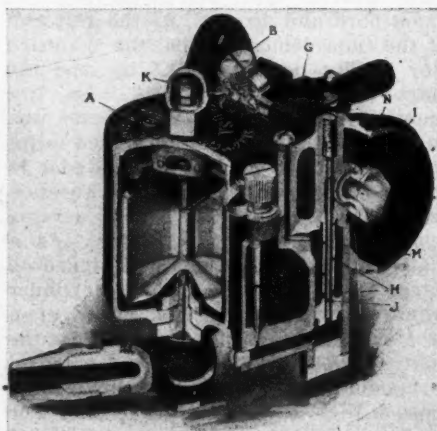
Sectional view of Stromberg carburetor used on Briscoe
